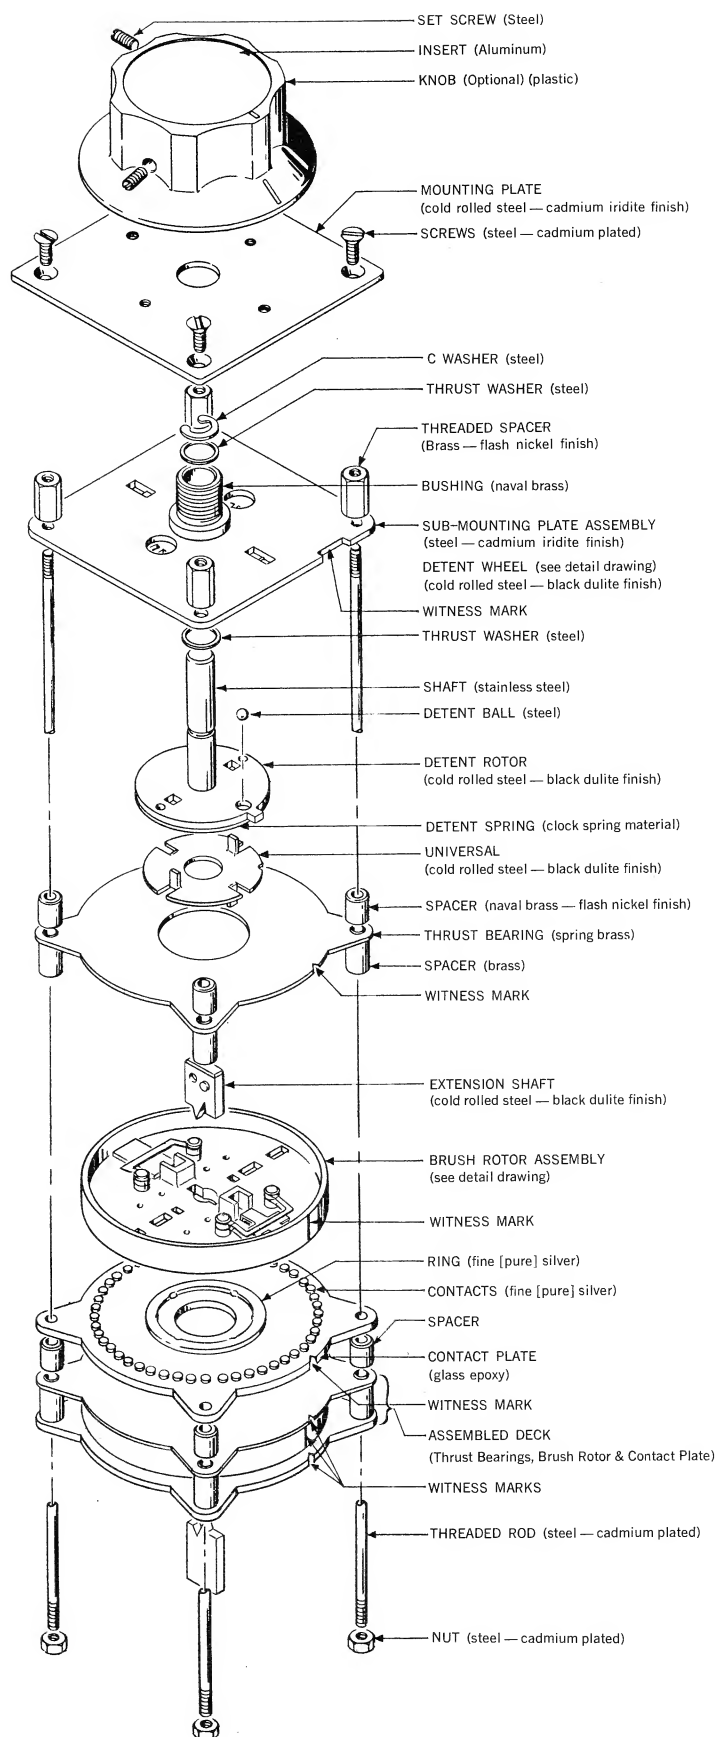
Exploded View of an Altec Rotary Precision Switch
